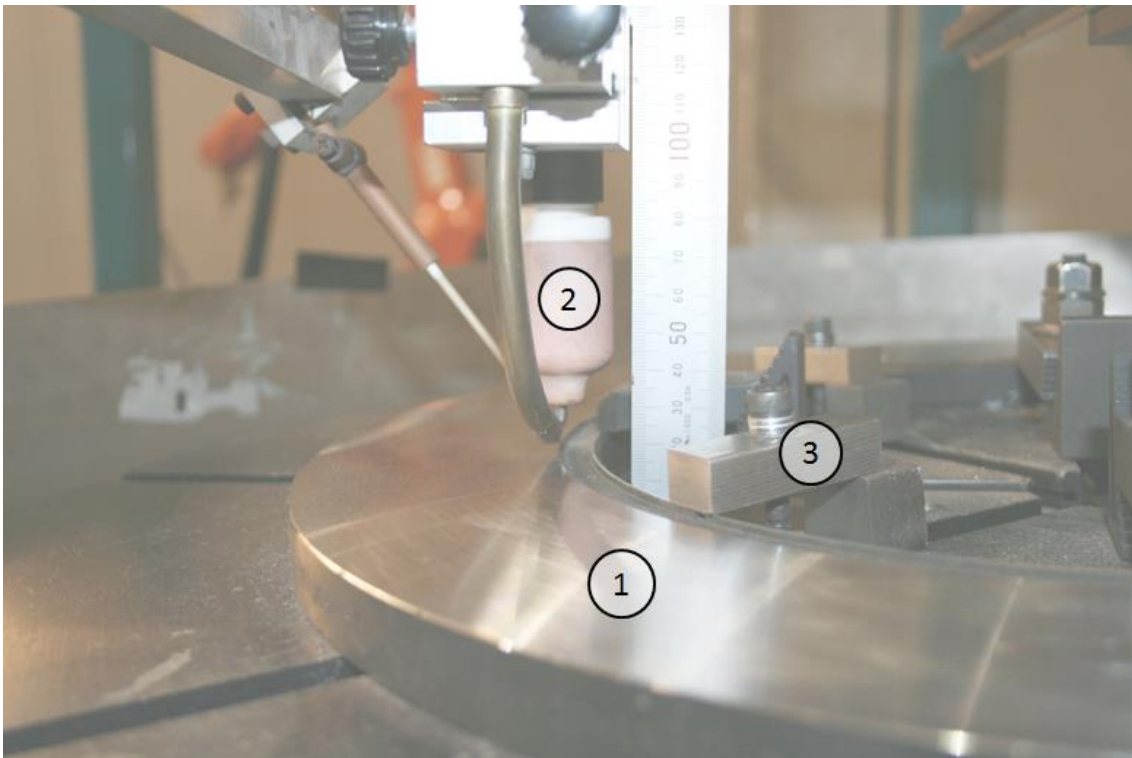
460 mm railway brake disc (non-ventilated), disc with TIG torch in start position for GTA cladding; 1: wear surface; 2: TIG torch; 3: clamping system
